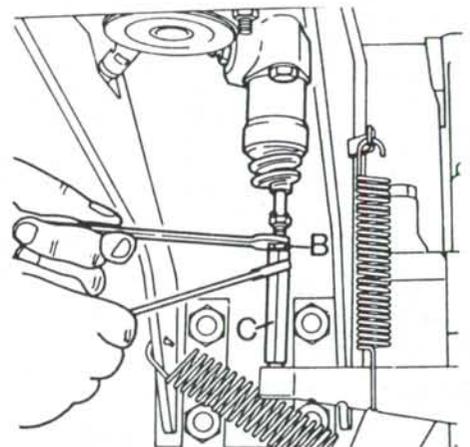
View showing adjusting sleeve (C) and locknut (B) on 1490 and 1690 models.
